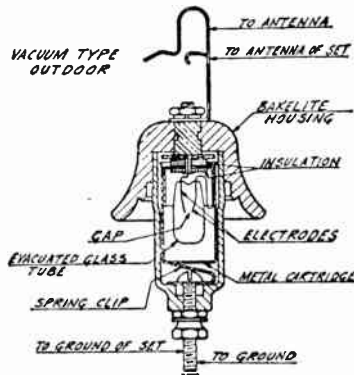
A sectional view of a vacuum type of lightning arrester.
